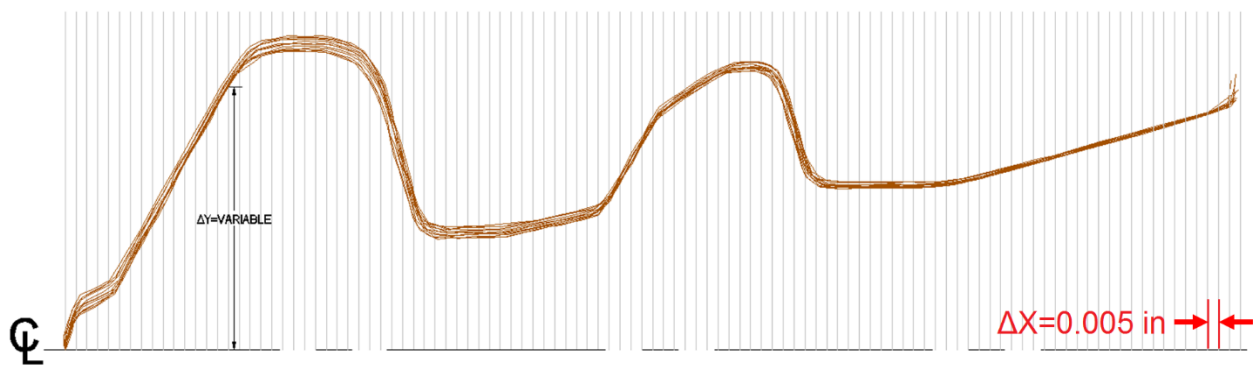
Superimposed Profiles of the As-Built 6Sd-00 Hub Connector Slot Profiles Divided at a Constant Horizontal Increment
